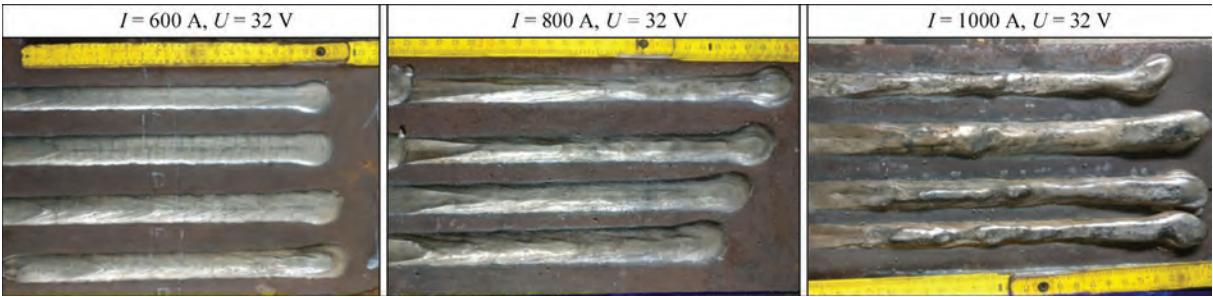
Outer appearance of bead on plates SAW welds produced with different parameters
